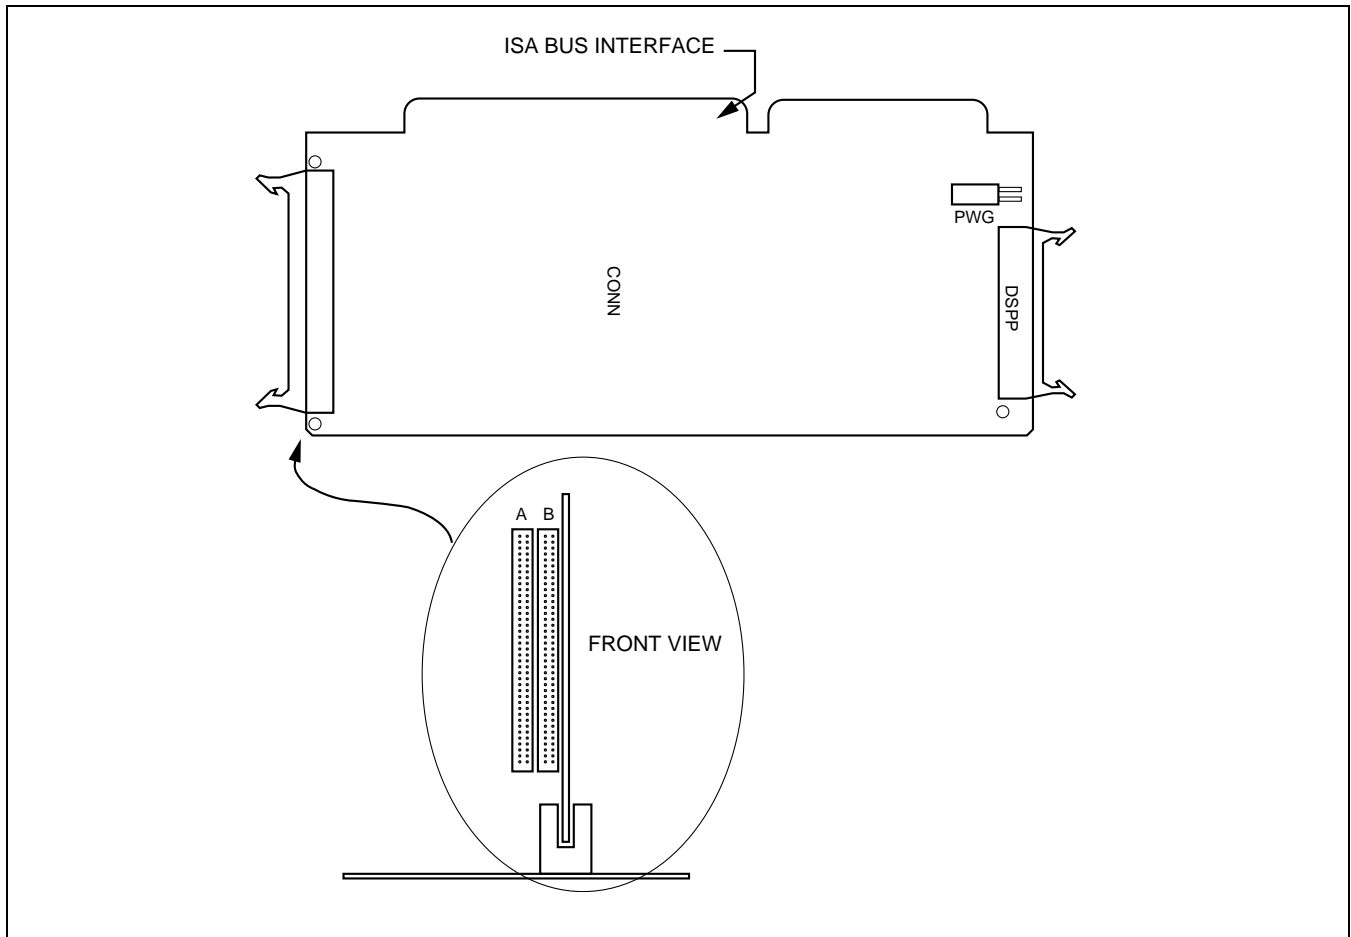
Face Layout of PZ-GT13 (ISAGT)
